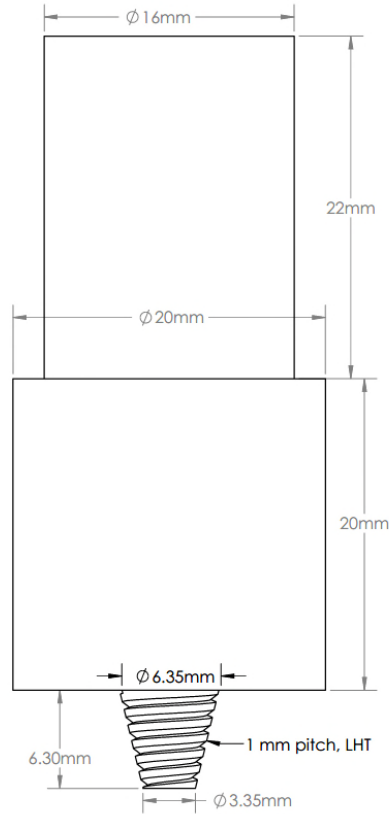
Friction stir welding tool with dimensions.
